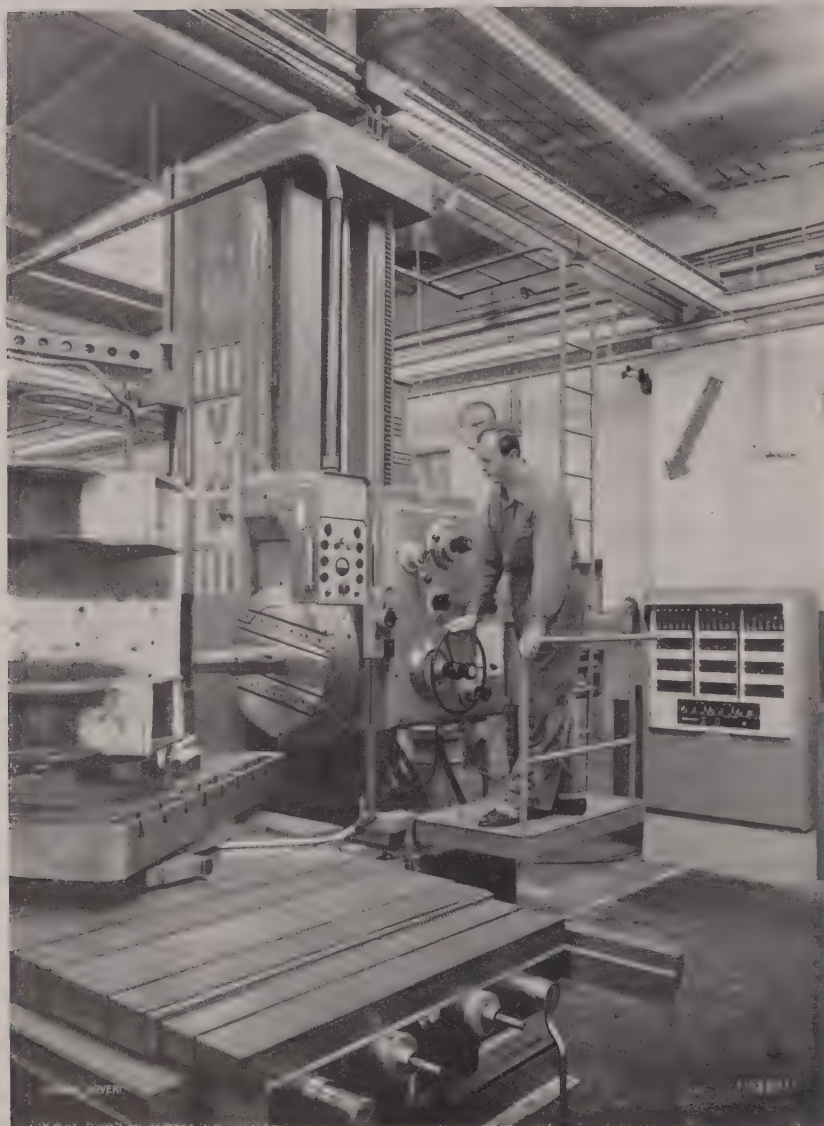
Horizontal boring machine with universal clamping table, equipped with
